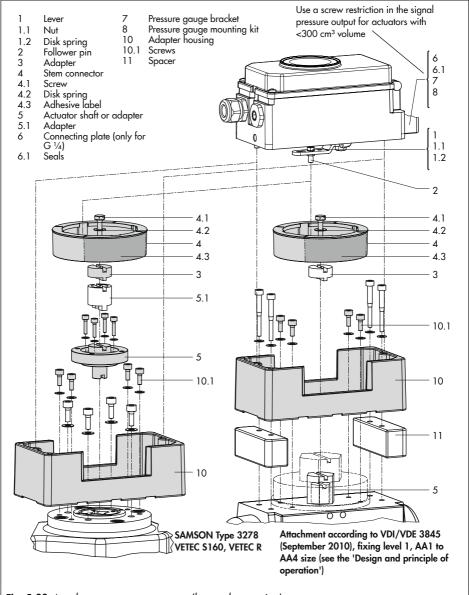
Attachment to rotary actuators (heavy-duty version)
